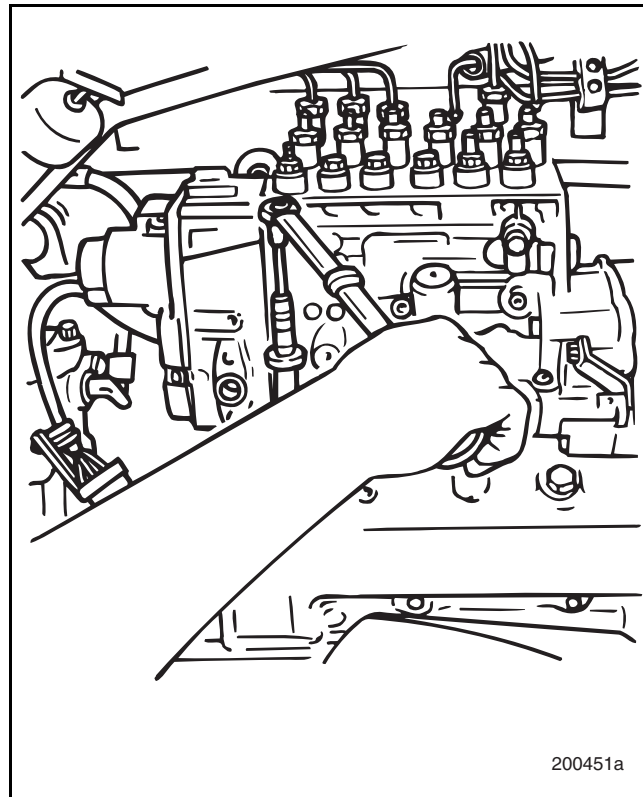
Torquing Upper Support Bracket-to-Fuel Injection Pump Capscrews
